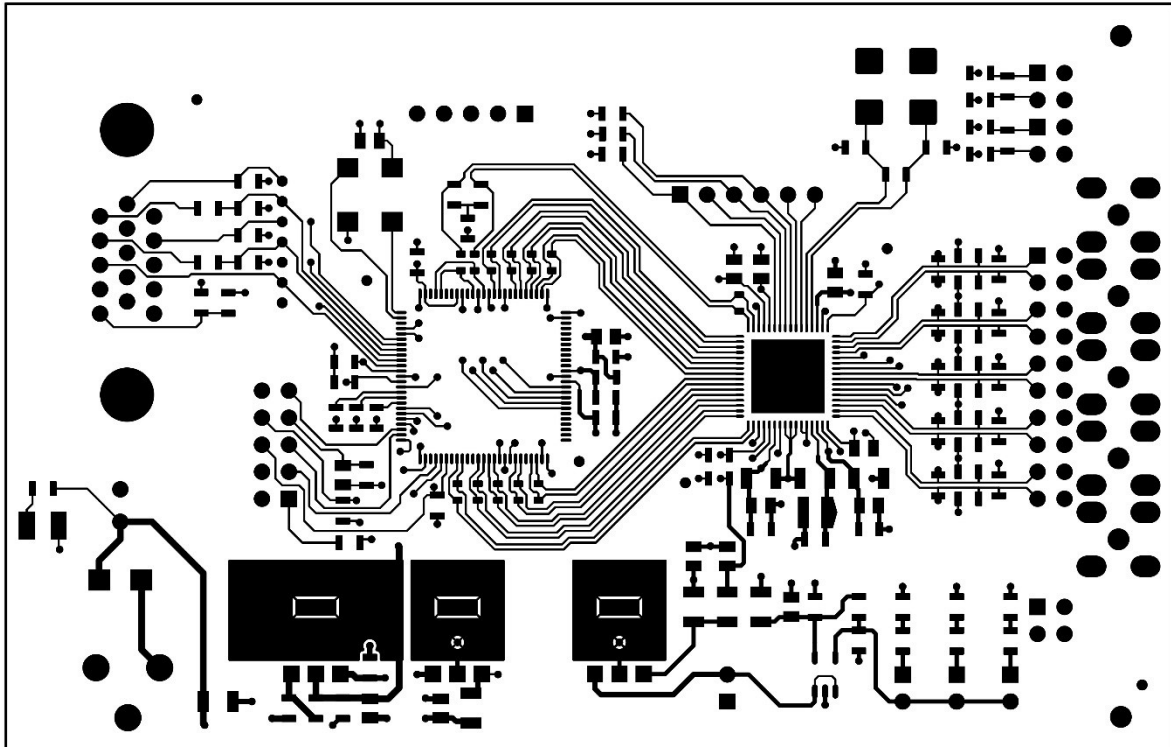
GPX2-EVA BOARD Layout: GND Layer
